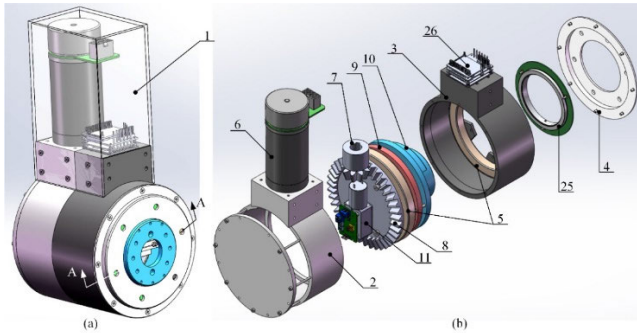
CAD model of the proposed VSA: (a) Overall isometric view; (b) Partial explosion view; 1-4: protective cases, 5-large bearings, 6-position motor, 7-8: bevel gears, 9-input frame, 10-output frame, 11-stiffness adjustment motor, 25-encoder.
